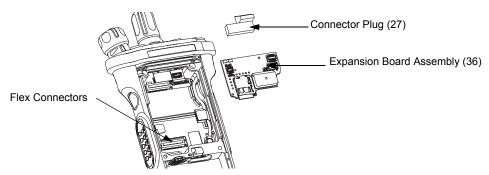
Remove Flex Connectors and Expansion Board Assembly
